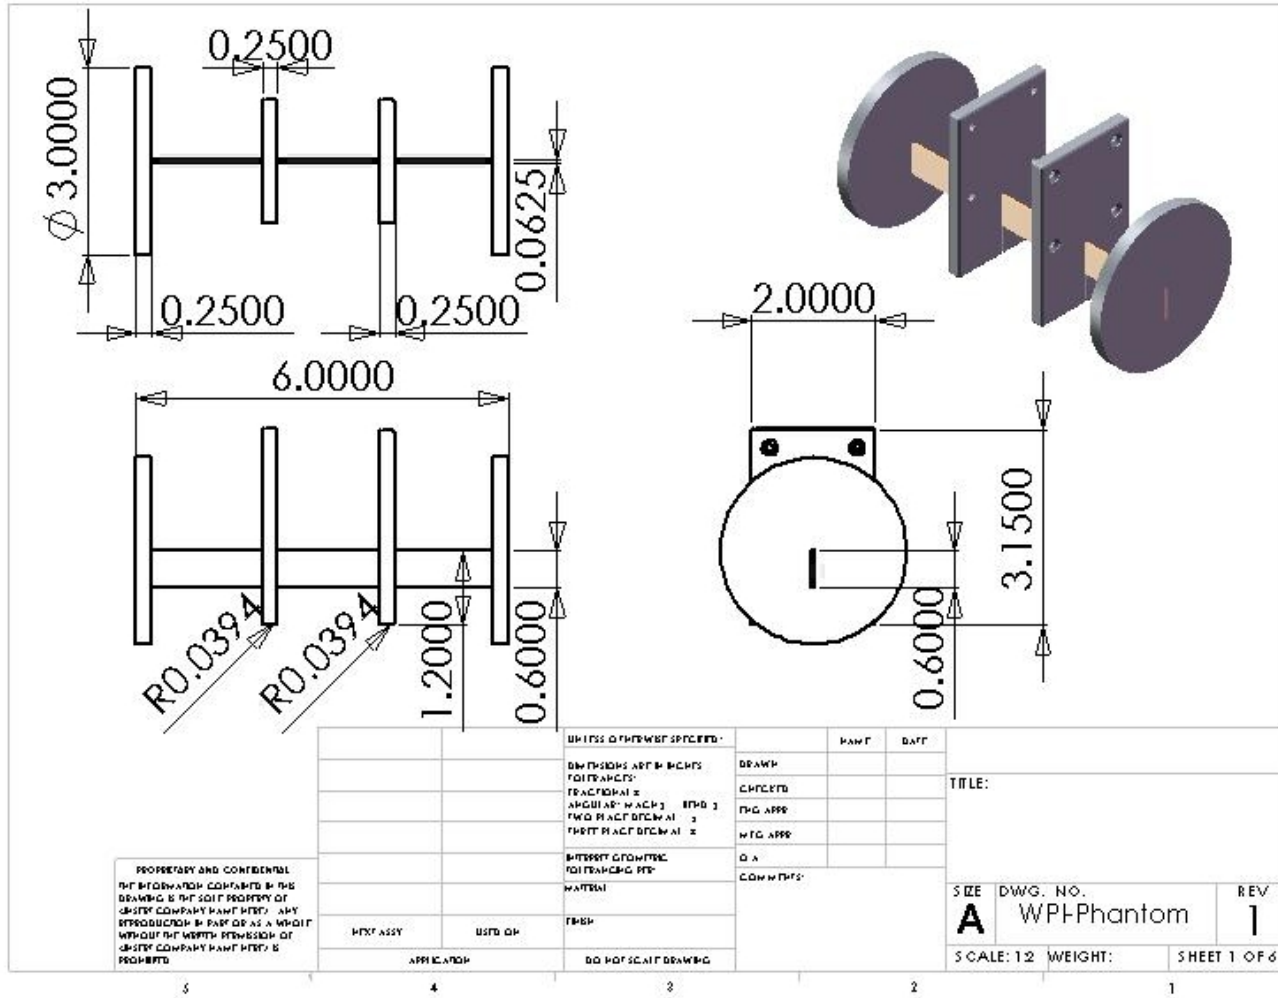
CAD Drawing of WPI Calibration Fixture
